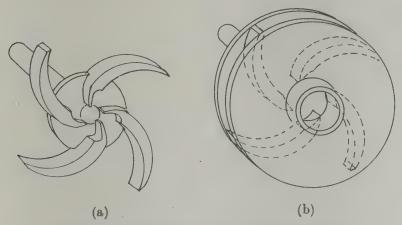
CENTRIFUGAL PUMP IMPELLERS.
